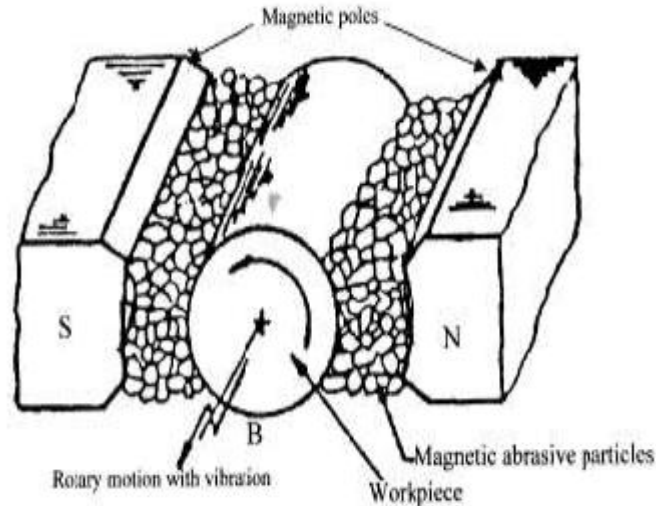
Finishing process of cylindrical workpiece in MAF [Kumar *et al.*, 2008]
